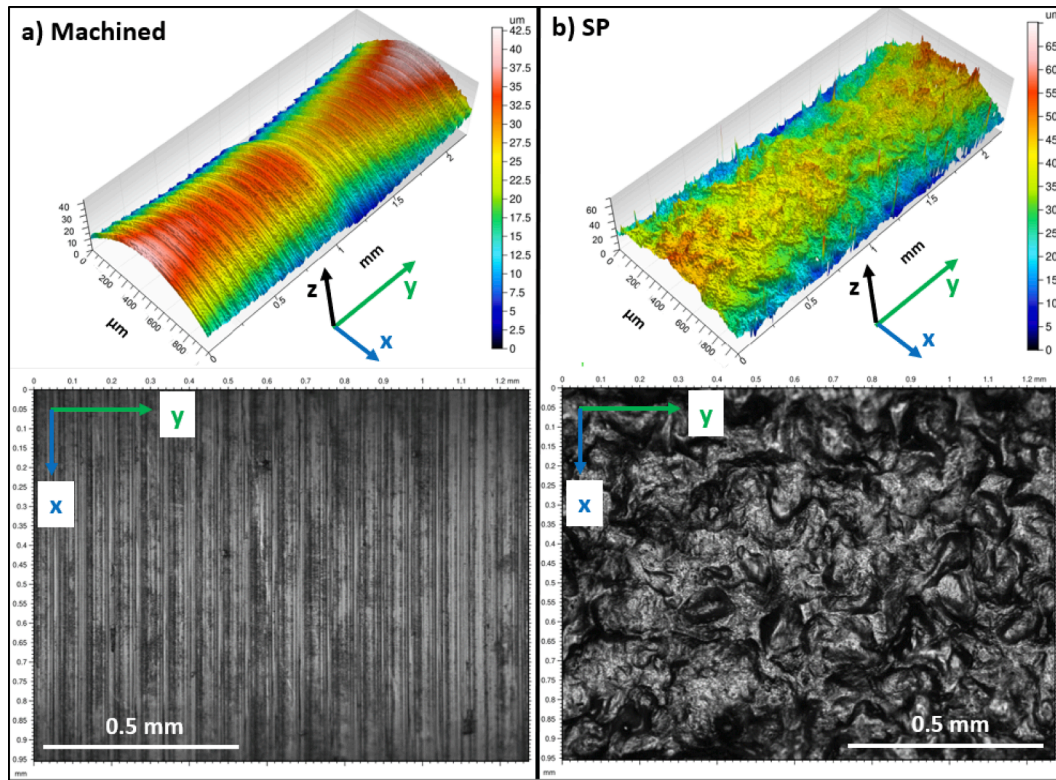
The 3D topography and surface detail of specimens: (a) machined and (b) SP.
